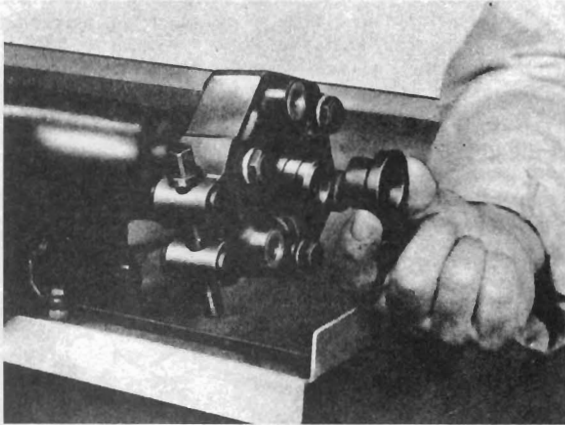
Removing the rubber cap from the front coupling (Sec 3)
